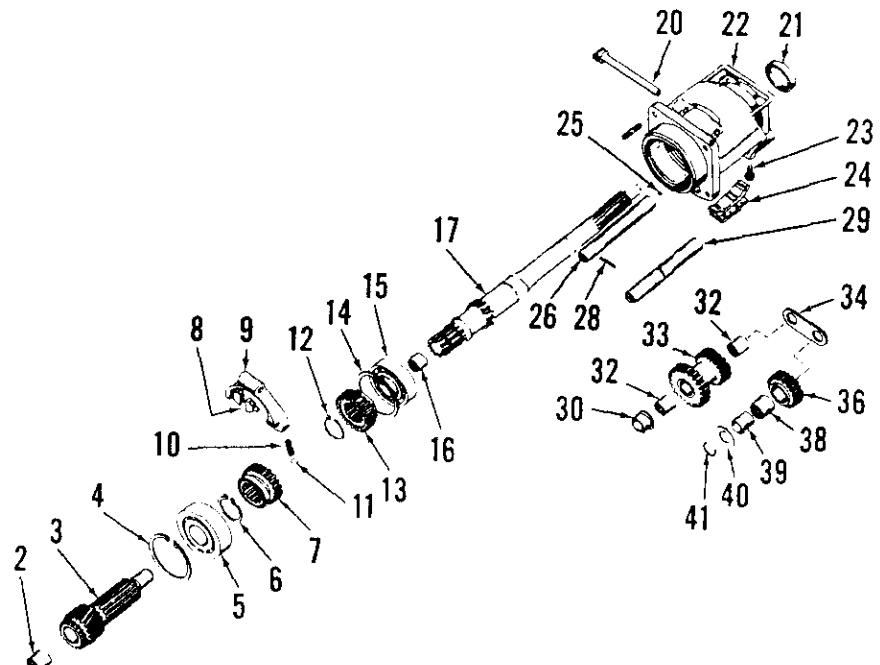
Exploded view of the forward and reverse transmission which is available for the Series 364, 384, 424, 444, 2424, 2444 and B-414 tractors.
